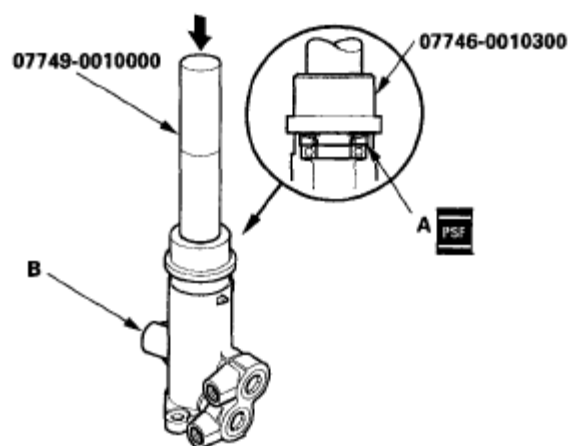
Identifying Area Applying Power Steering Fluid To Seal Ring Lip
